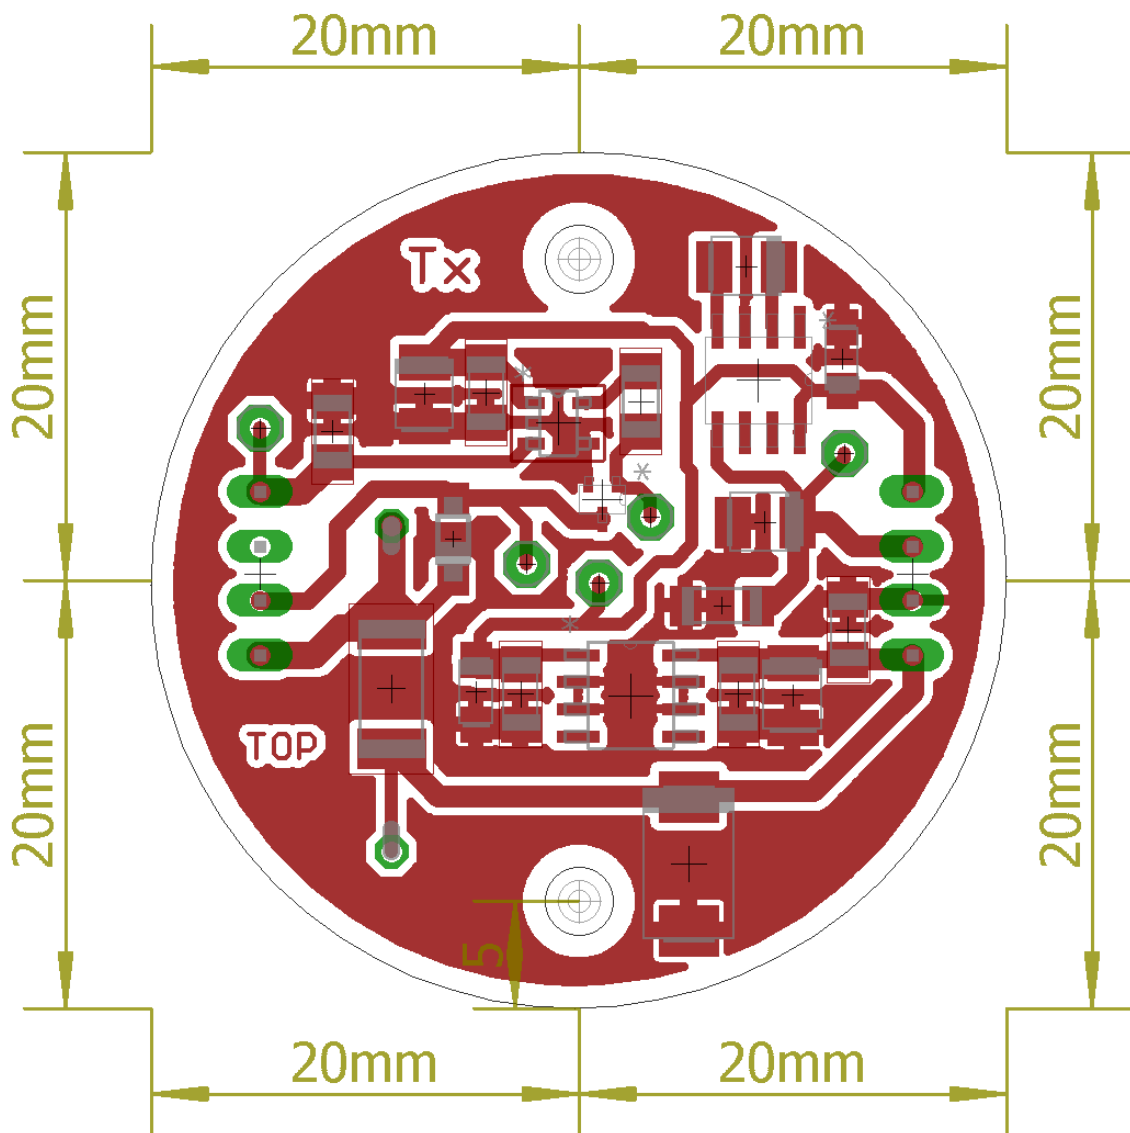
Final PCB Footprint - Tx layer (only top layer).
